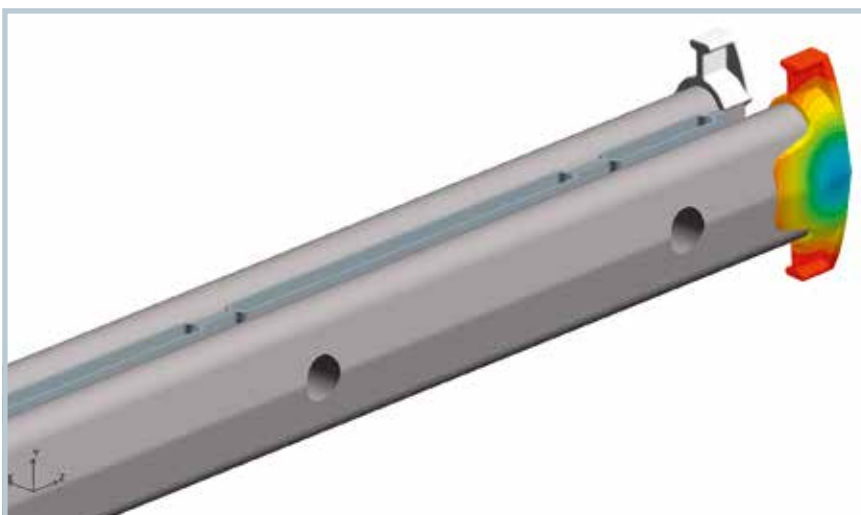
The clip fixes a basket on a slide. For assembly, dimensional accuracy is imperative (© Sigma Engineering)
